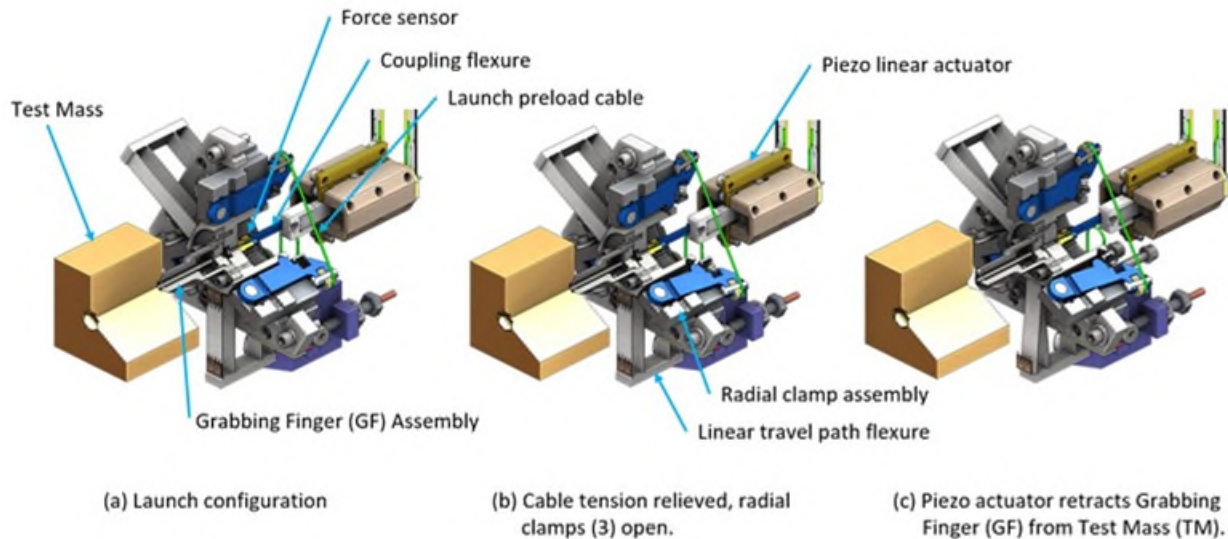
Partial sectional view of caging mechanism subassembly tensions a circumferential cable to constrain the GF body for launch. The cable tension is released with sufficient stroke for radial clamps to open, allowing the piezo actuator to articulate the GF body.
